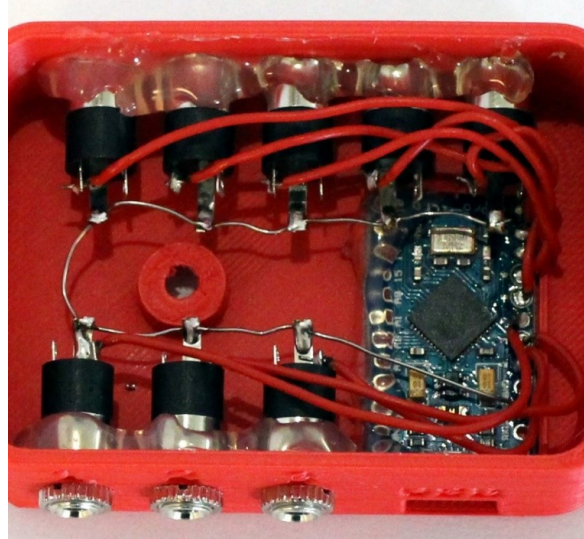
A wire is connected to the GND pin of the Arduino and pin 1 of the jack sockets
